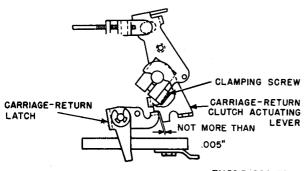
Carriage-return-clutch lever shaft clearance adjustment.
